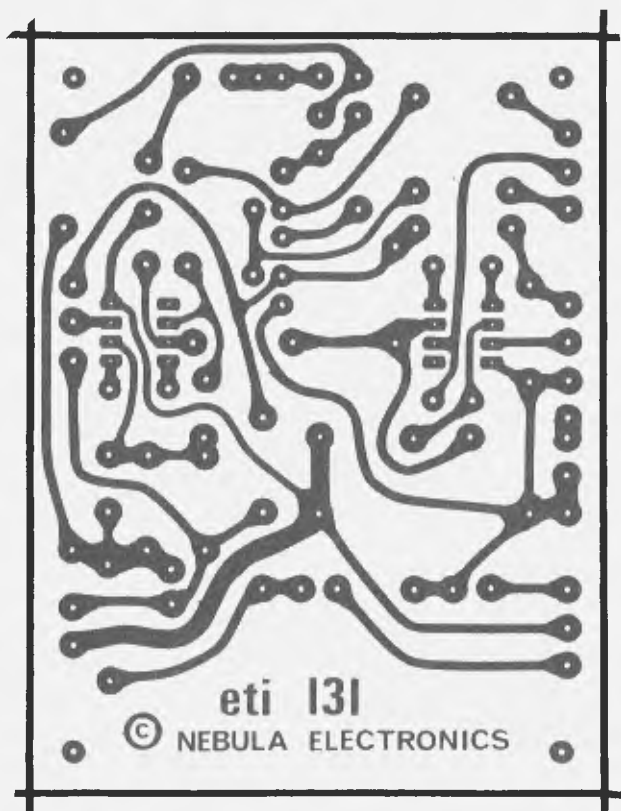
Printed-circuit board layout for the power supply. Full size 100 x 75 mm.
